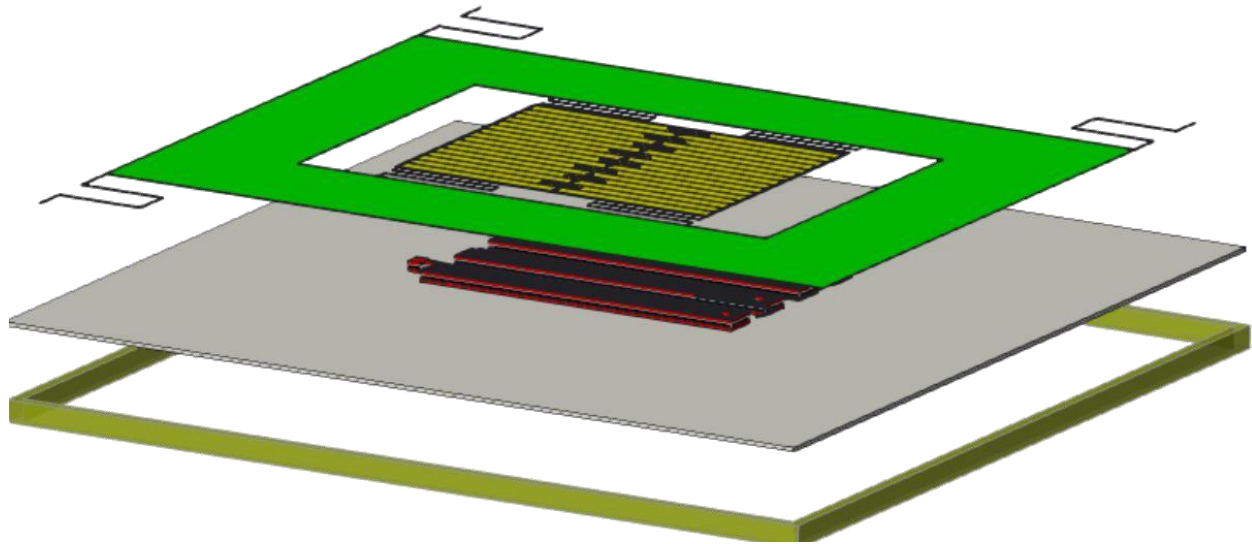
Exploded view of Micro Electromagnetic Harvester
